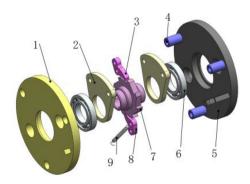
Ratchet exploded view. 1. outer panel; 2. pawl support; 3. pawl; 4. support sleeve; 5. fixed plate; 6. Bearing; 7. ratchet; 8. lock pawl; 9. spring.
